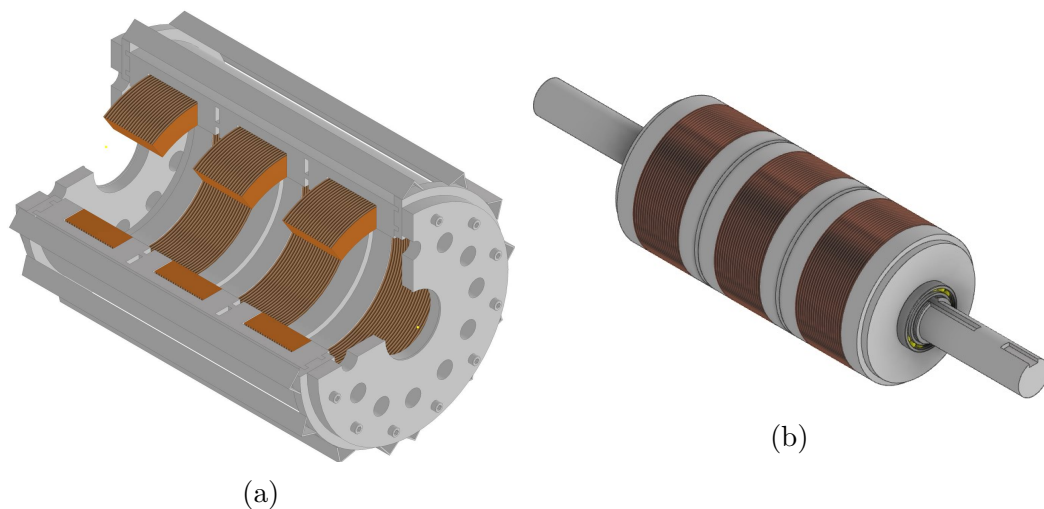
(a) The stator assembly and (b) the rotor assembly
